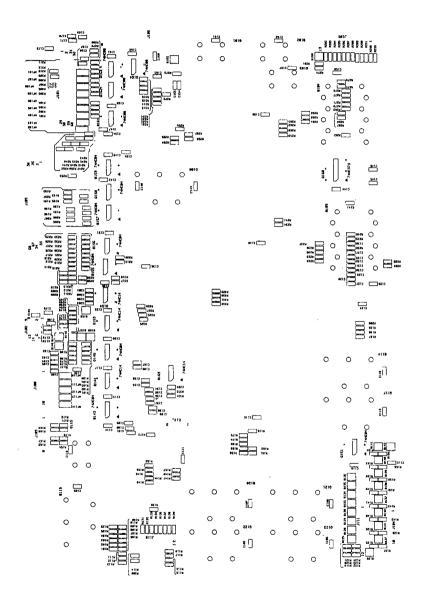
A IMAGE PROCESSOR PCB ASSEMBLY (NEW)('/2) イメージプロセッサ回路基板 (新) ('/2)
